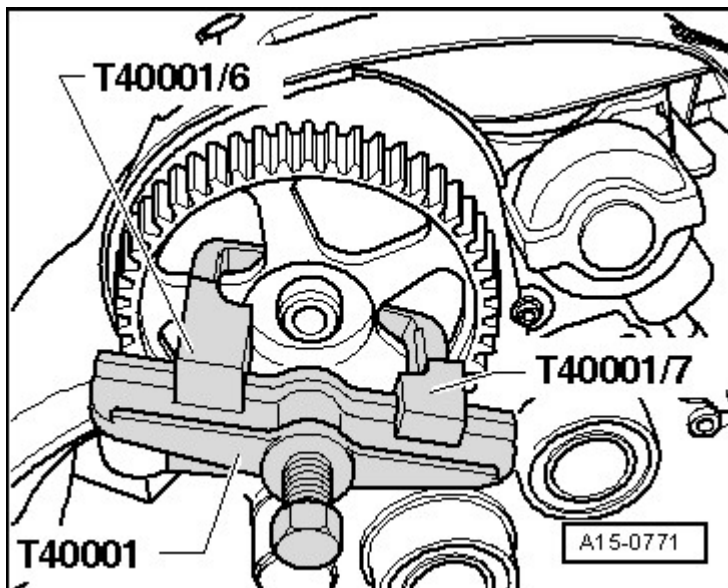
Identifying Puller T40001, Claw T40001/6 And Claw T40001/7
